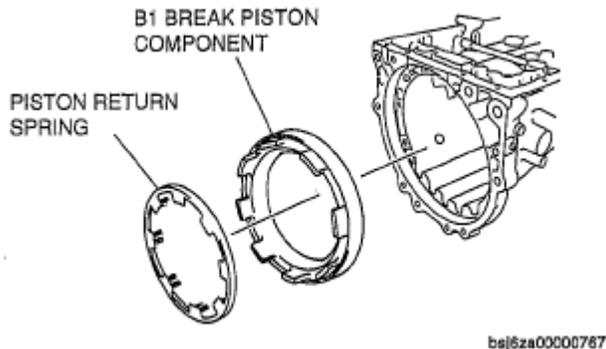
Identifying Piston Return Spring And B1 Brake Piston Component
